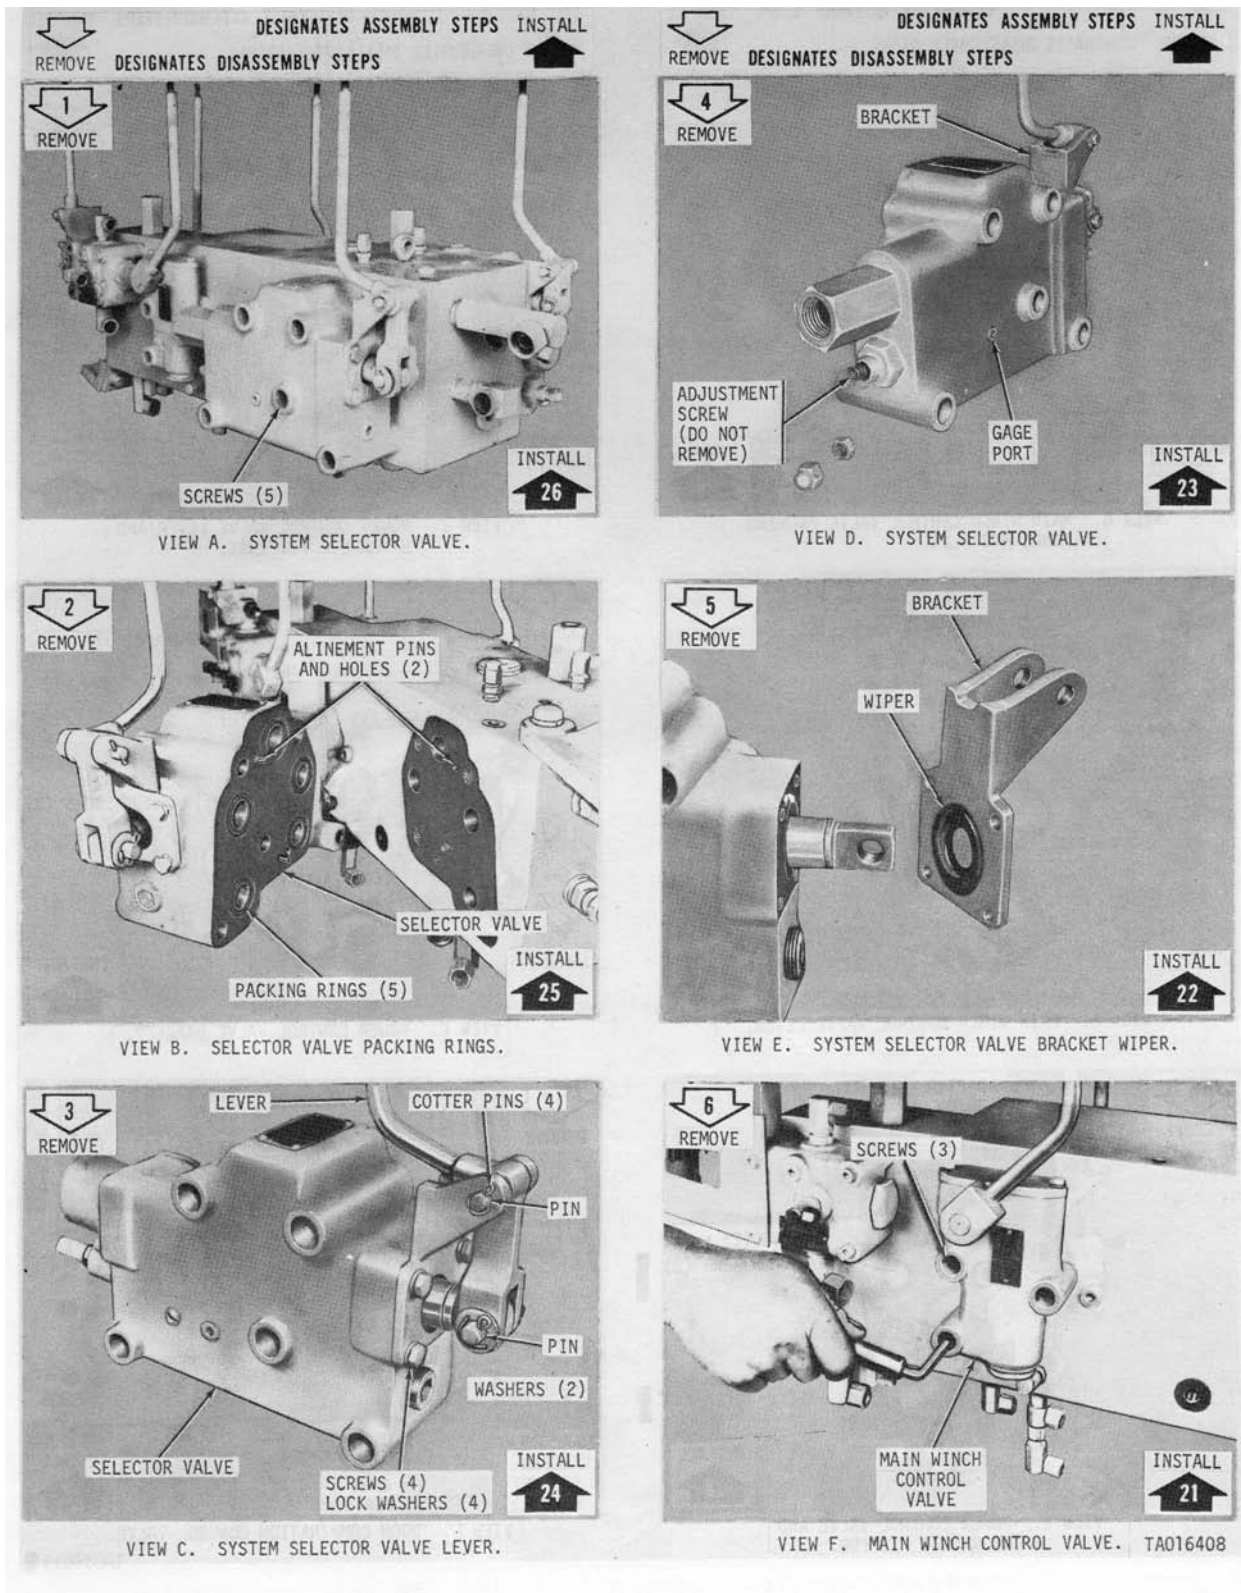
Disassembly of hydraulic subplate assembly into subassemblies (Sheet 1 of 5).
